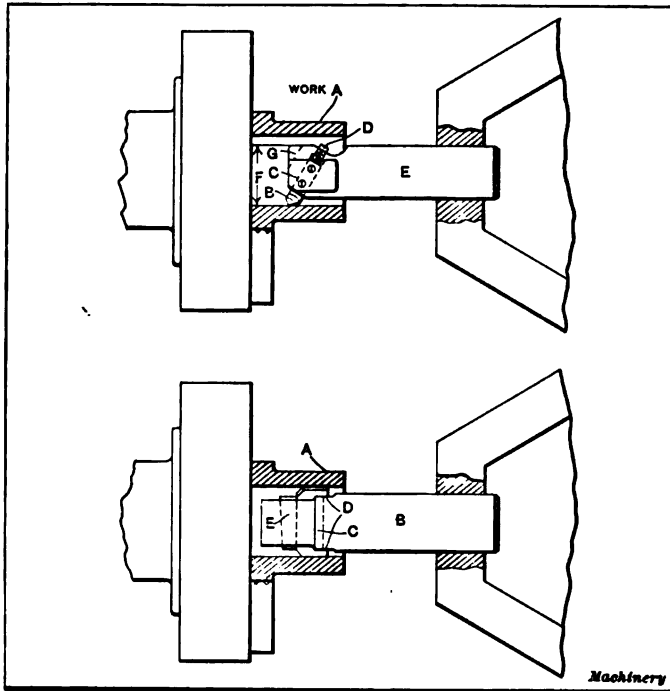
(Upper View) Boring-bar with Adjustable Cutter; (Lower View) Boring-bar with Double-ended Cutter
